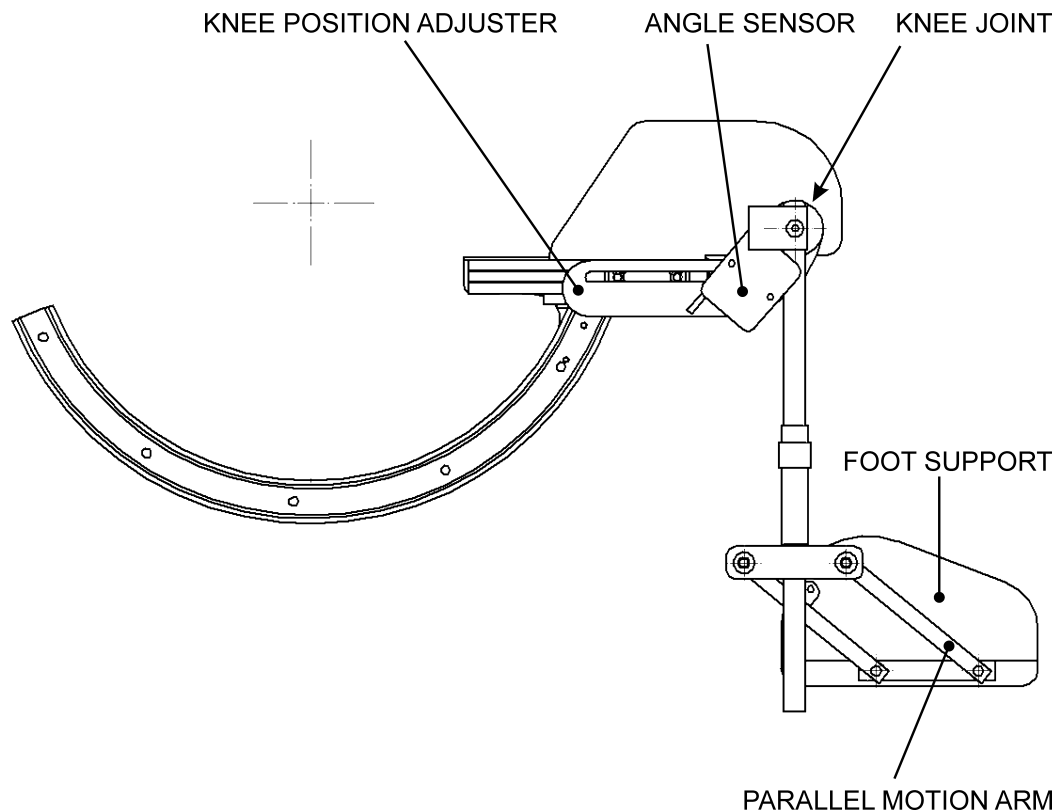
A drawing of the medial side of the leg support assembly. This drawing shows the knee joint with its distal/proximal adjustment; and the foot support with its sprung parallel motion mechanism that enables the child's heel to lift during a spasm.
